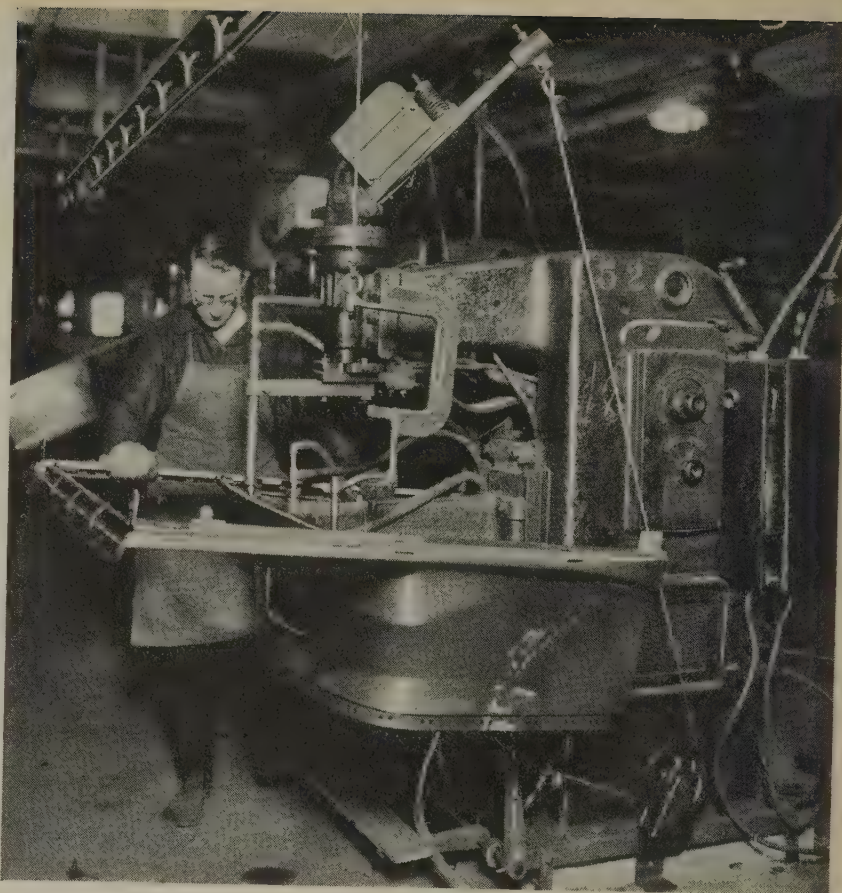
One of the 19 Machines Required to Assemble Front Ends of Auto Bodies. Slight pressure on foot treadle starts an automatic cycle which completes one spot weld
